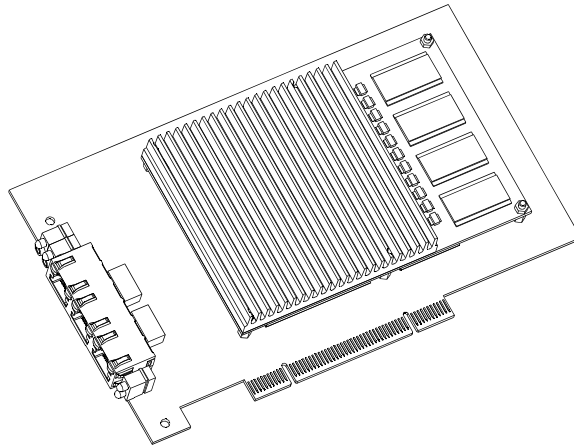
PC PCI Carrier Board with Passive Heatsink Cooling Solution
